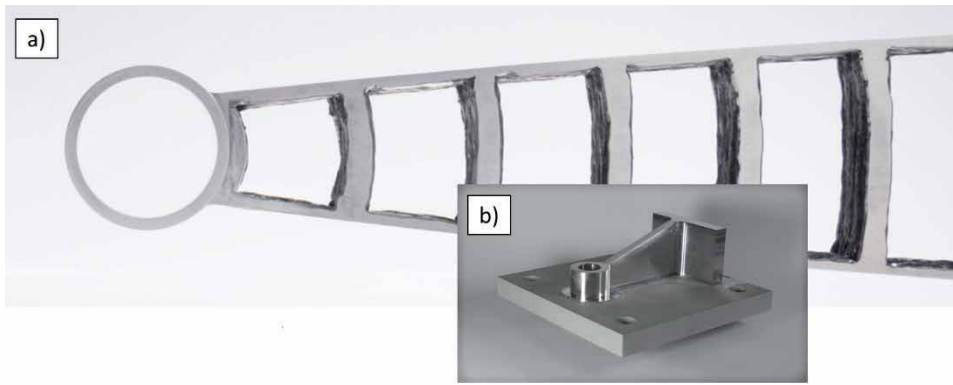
Two examples of PMD manufactured aluminum alloys components: a) lightweight arm from AlMg5Cr, b) bearing bracket made of AW 5356.
